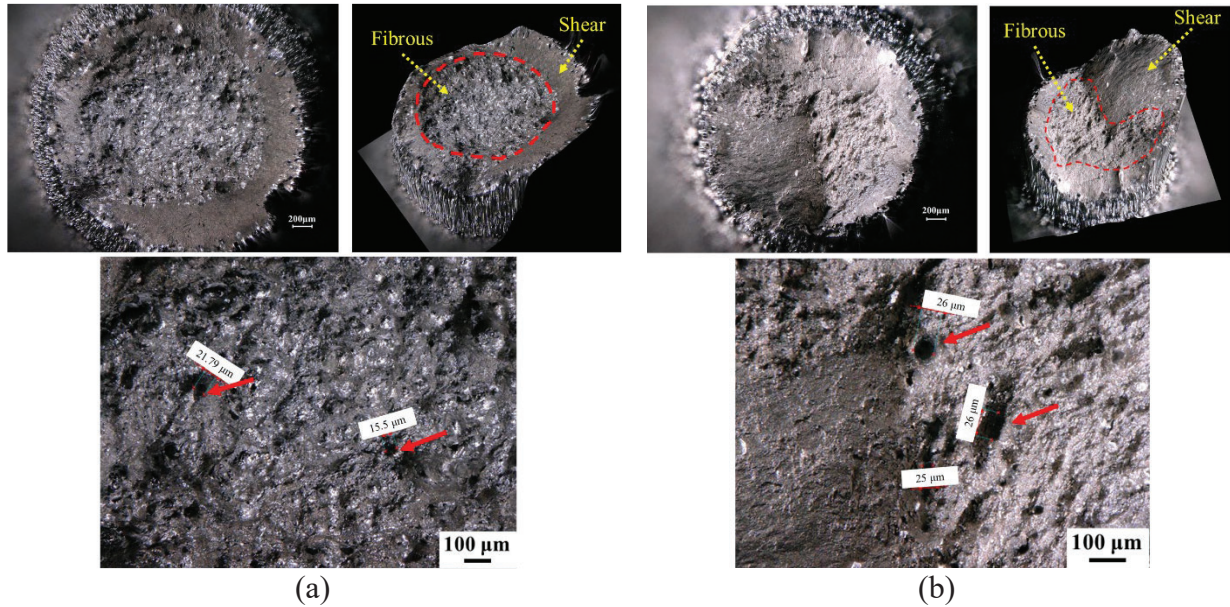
Tensile fracture surfaces of LB-PBF 316L SS specimens: (a) non-preheated, and (b) preheated build platform conditions.
